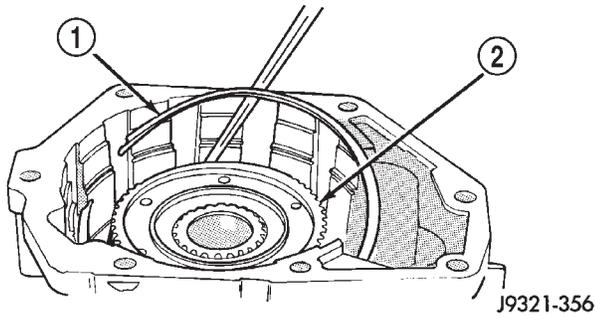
Overdrive Clutch Wave Spring Removal
